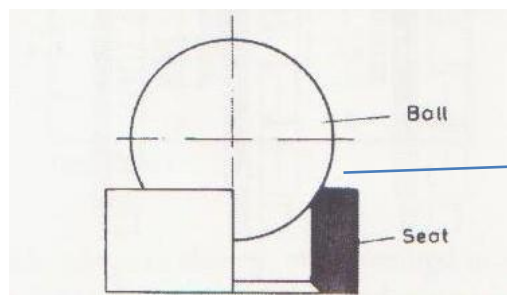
Operation of valve Assembly of Sucker rod pump)
